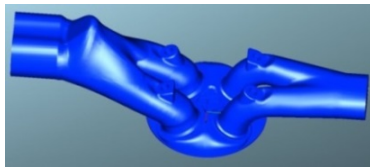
Perspective view of the combustion chamber geometry layout with 4-valves (upper view)
